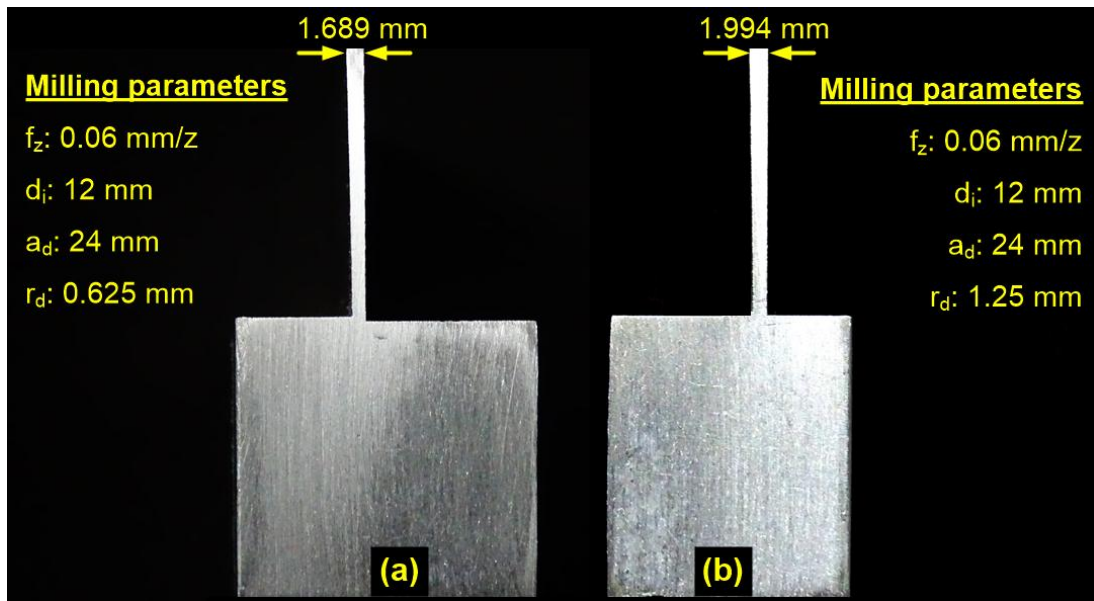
Side profile of a thin-wall after machining a 1.25 mm wall with: (a) 0.625 mm radial cut depth, (b) 1.25 mm radial cut depth
